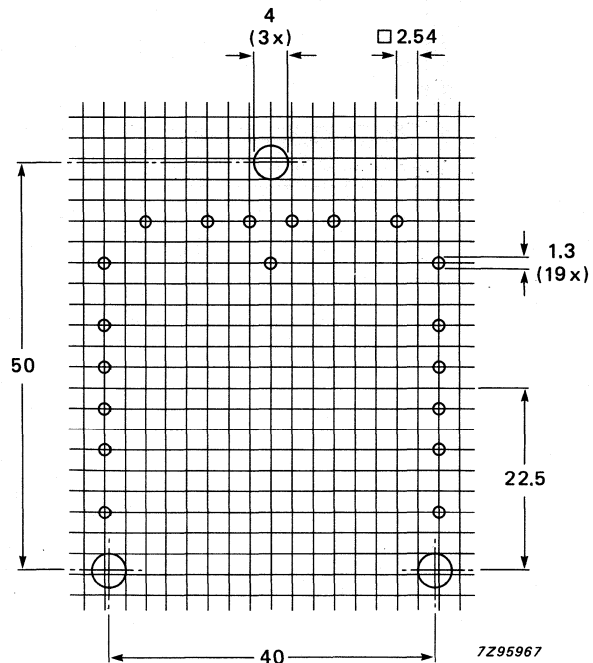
Hole pattern for mounting on a printed-wiring board (solder side).
